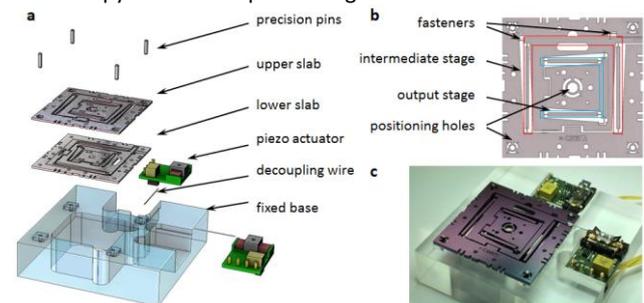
CAD exploded view (a), detail view (b) and photograph (c) of the X-Y stage.
